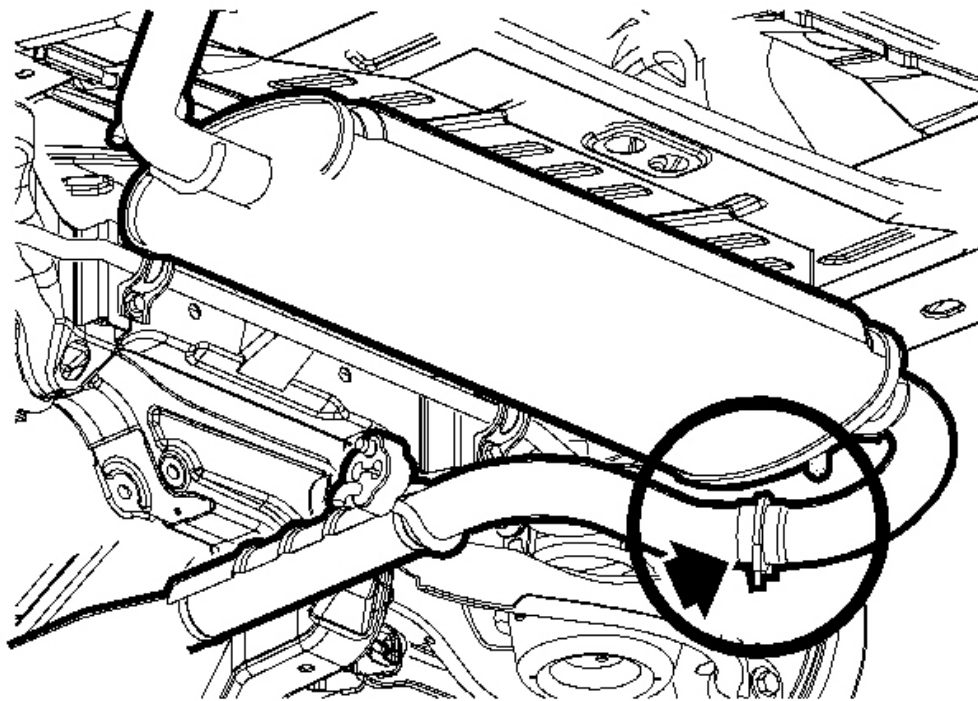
View Of Rear Muffler Pipe Service Clamp
